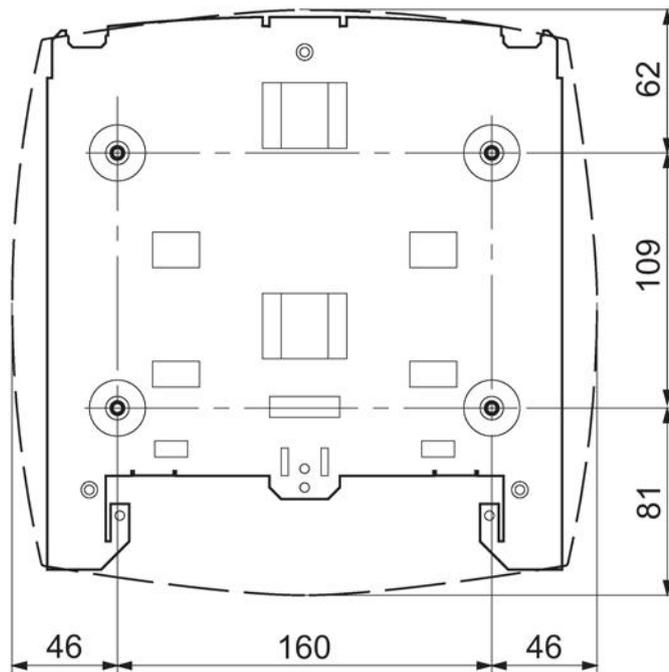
Drilling template for fitting the mounting plate to a wall
